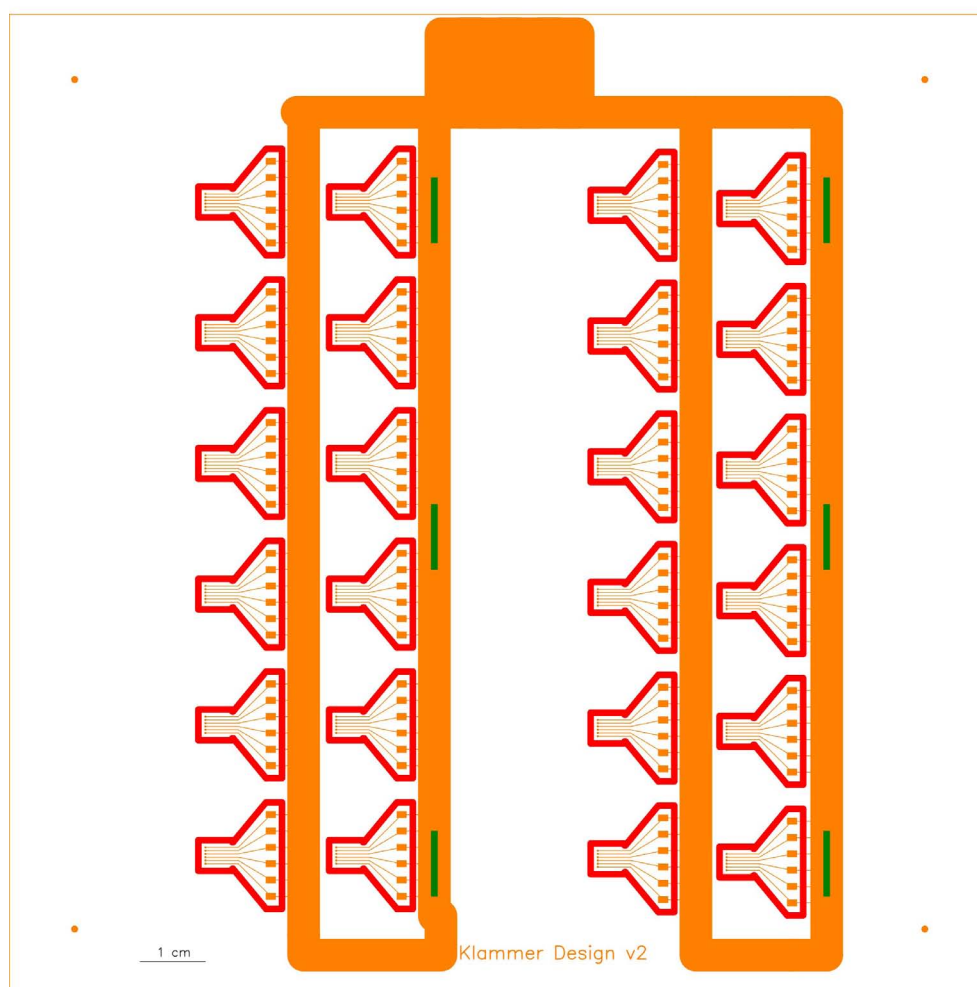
CAM 350 desing for the PCB piece of the contacting clamp -
